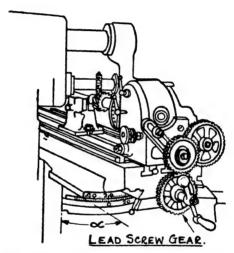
Universal Milling Machine with Table Set Over and Dividing Head Geared for Milling Spiral Cutter
